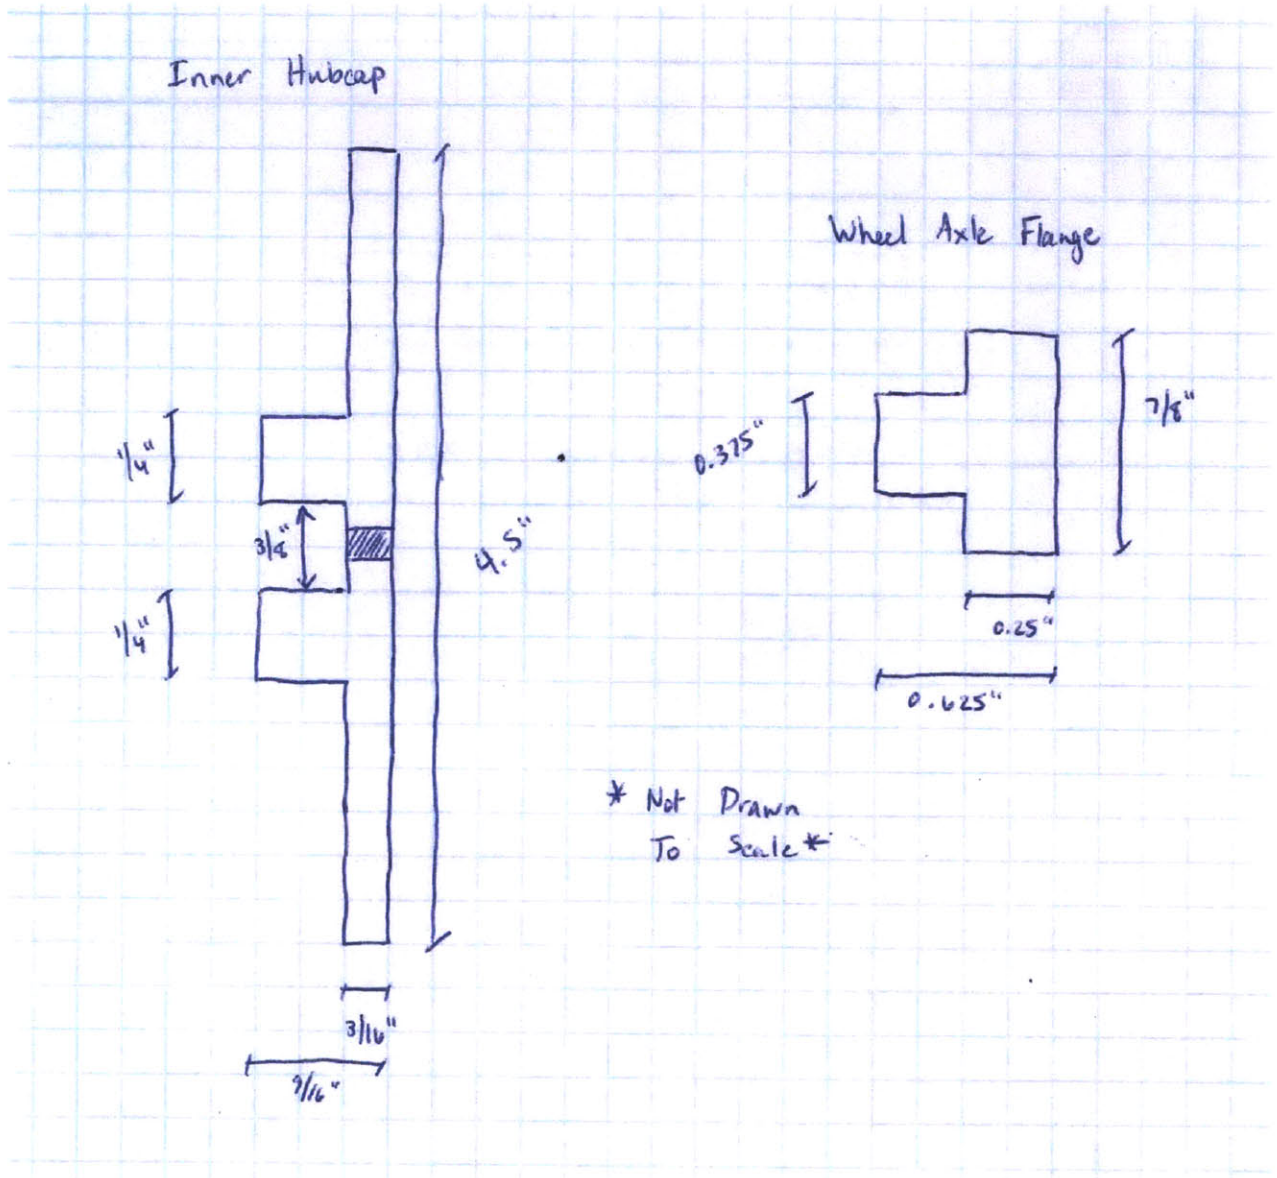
Dimensional drawings of inner hubcap and aluminum plug
